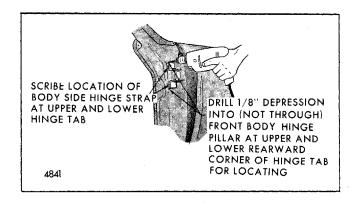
Body Side Door Hinge Strap Removal - H Styles
